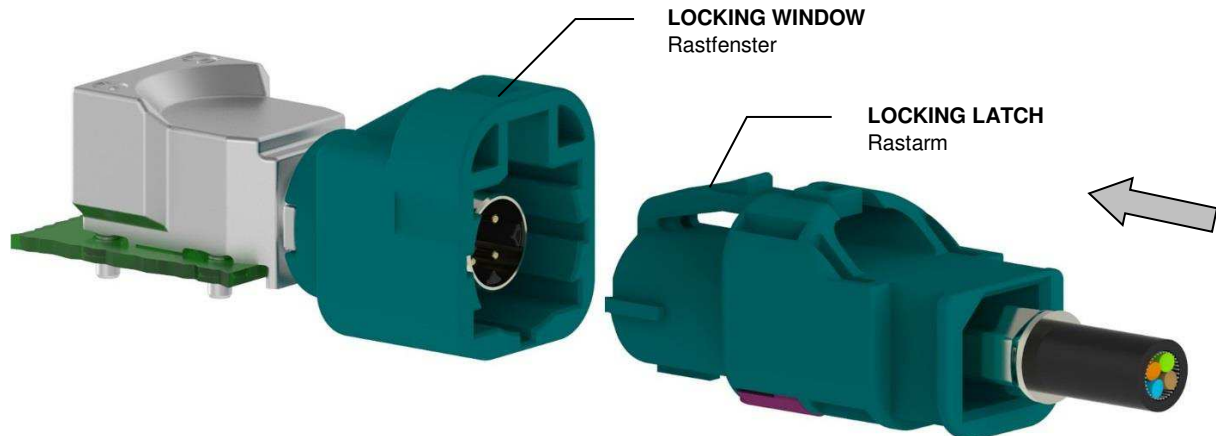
/ Bild 12: Assembly with cable connector / Montage mit Kabelbaumsteckverbinder
